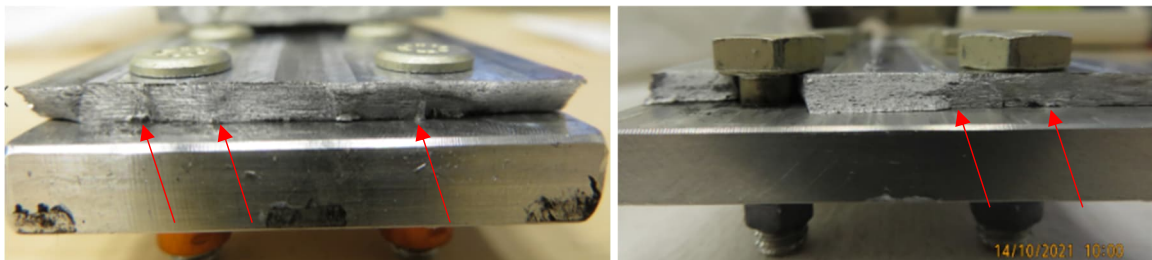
Typical fatigue failure of the skin plate. Red arrows indicate the crack initiation points.
